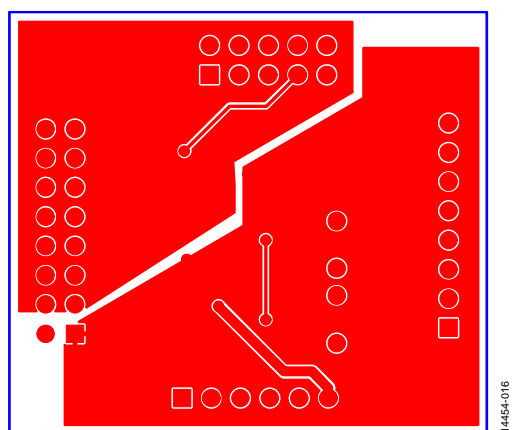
EVAL-AD5324DBZ Daughter Board Bottom Side Routing
